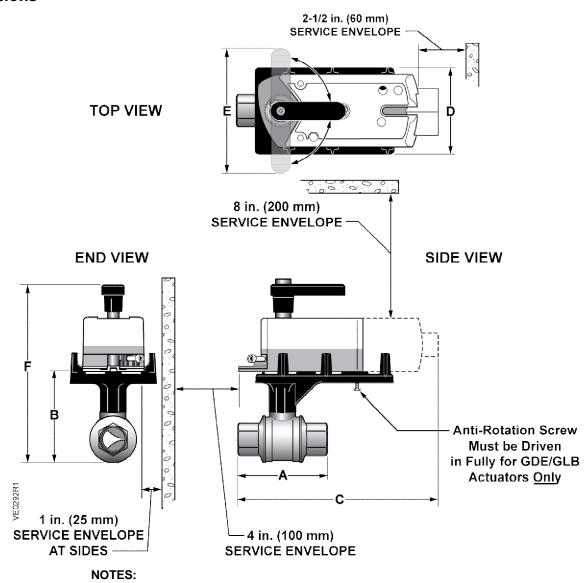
2-Way Ball Valve and Low Profile Bracket with Actuator Dimensions in Inches (Millimeters).
